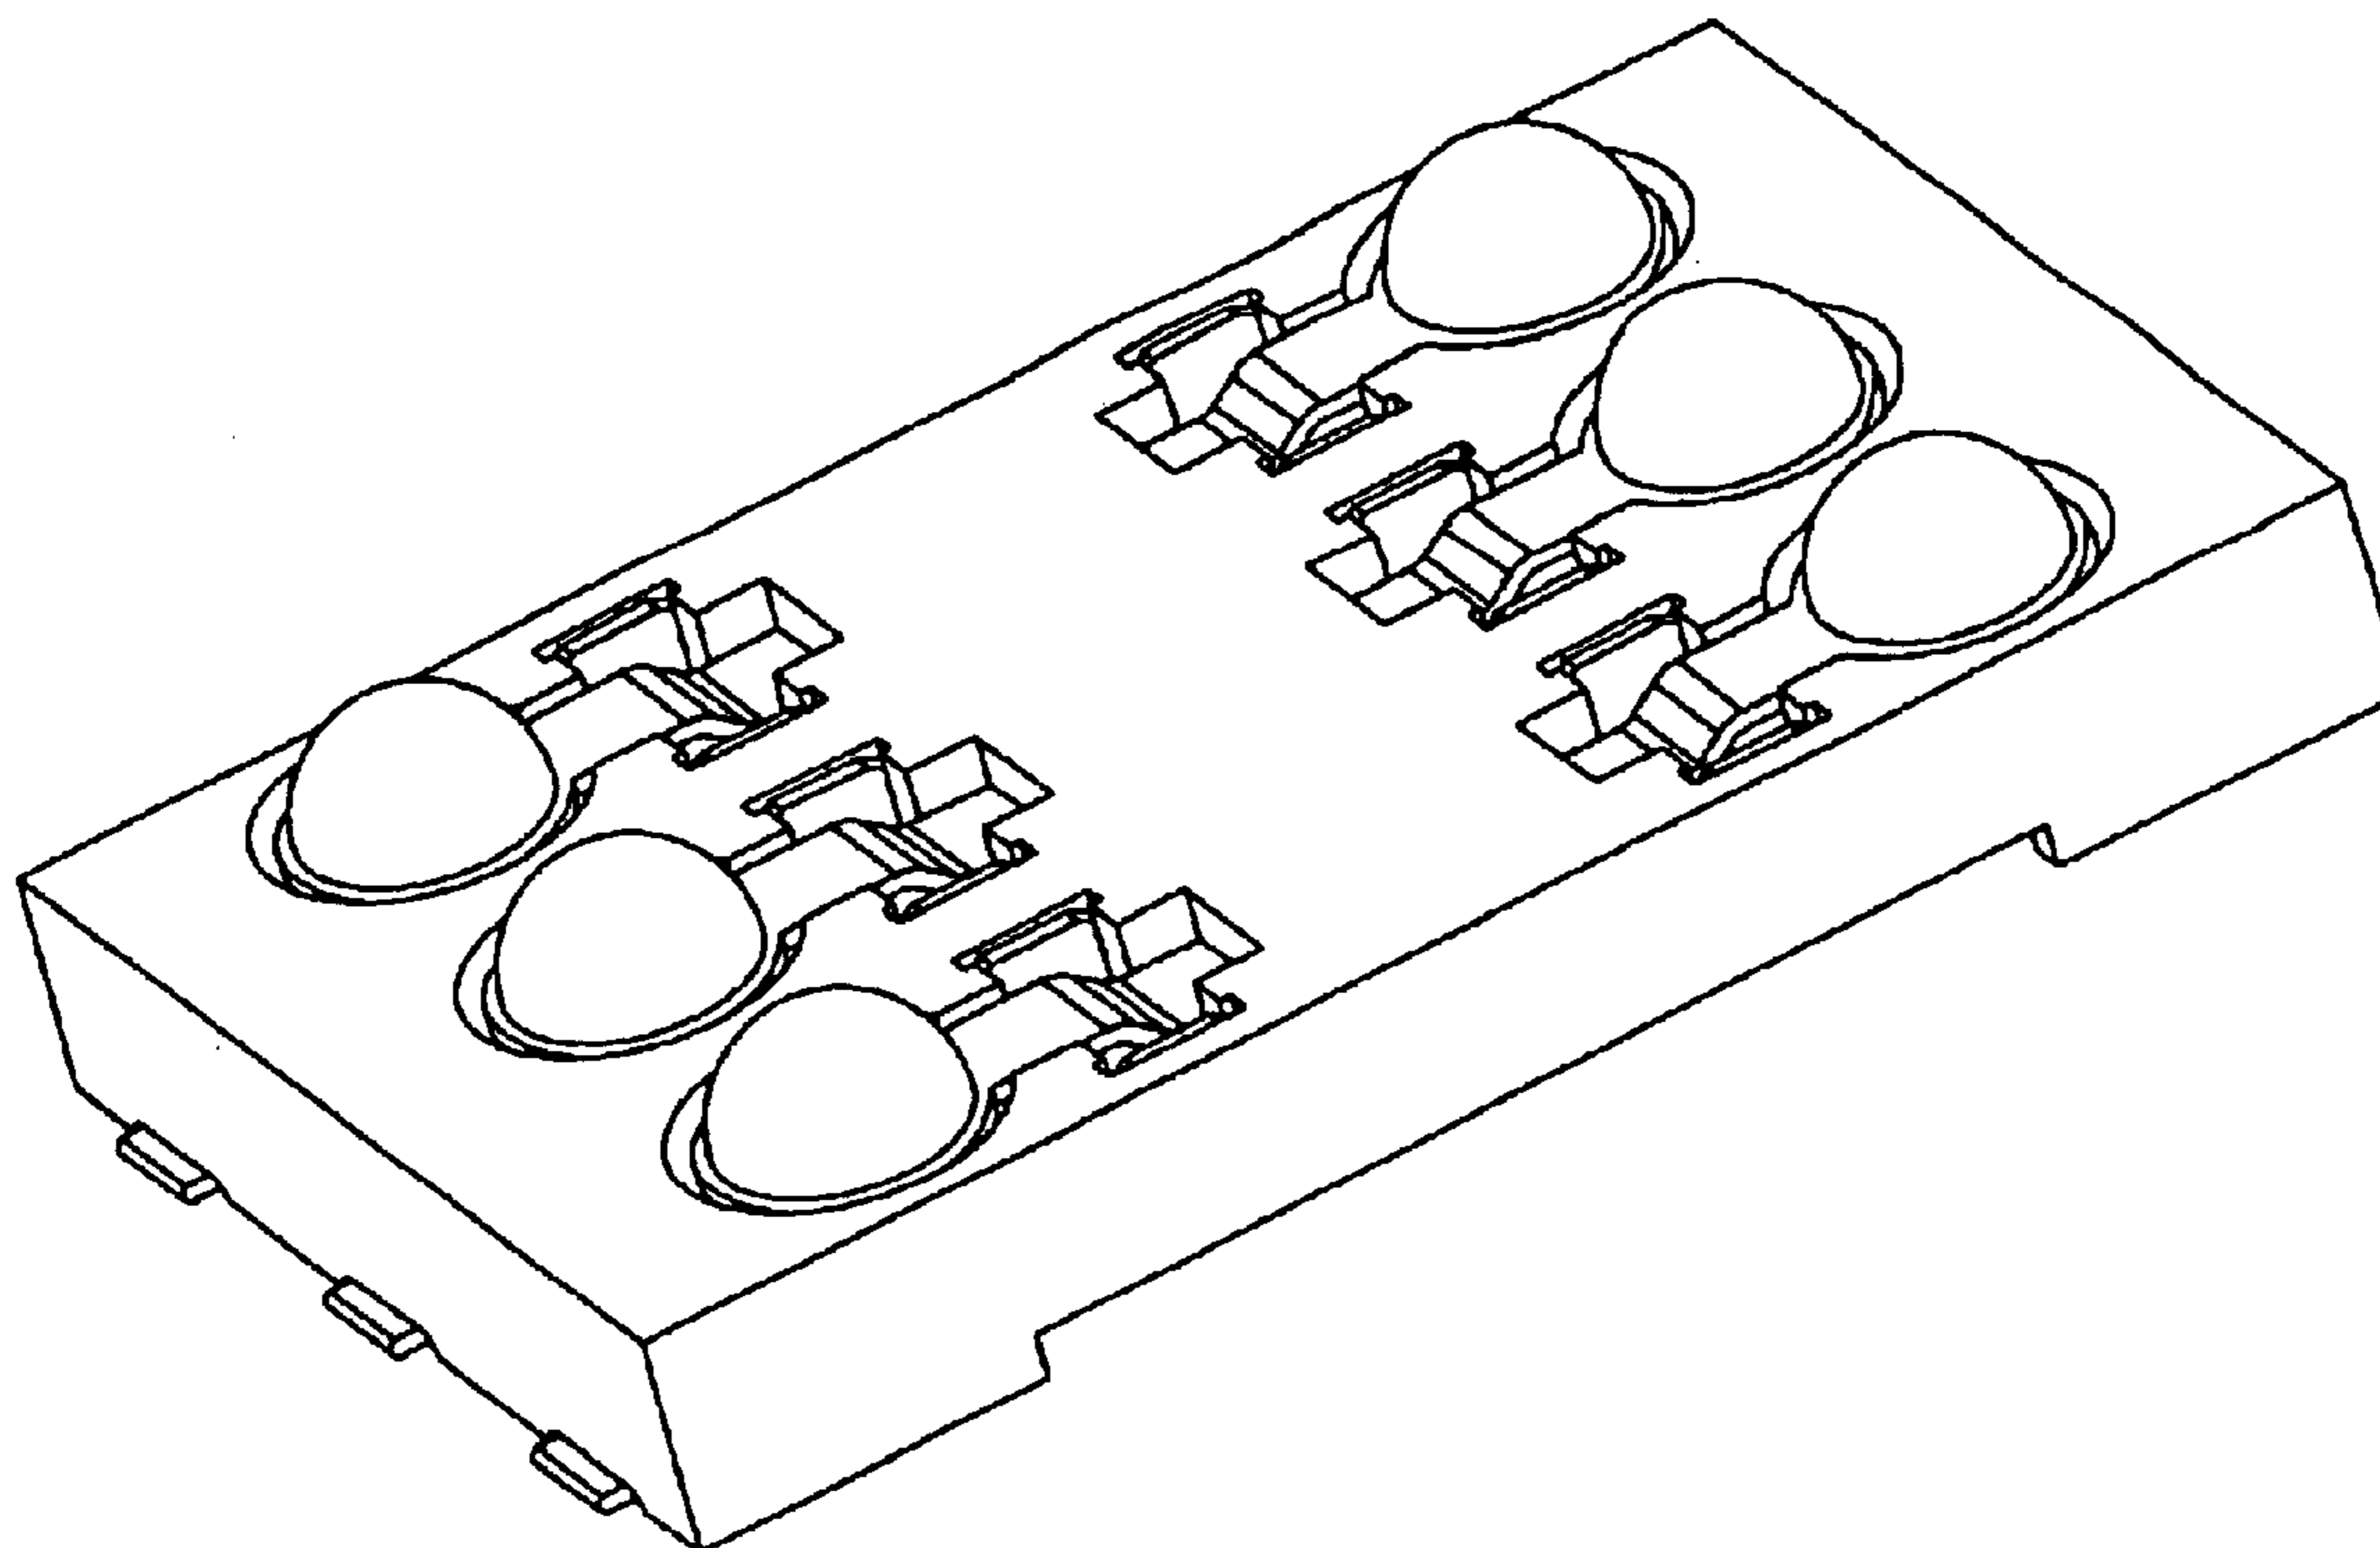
is a perspective top view of a SIM card connector showing our new design;
